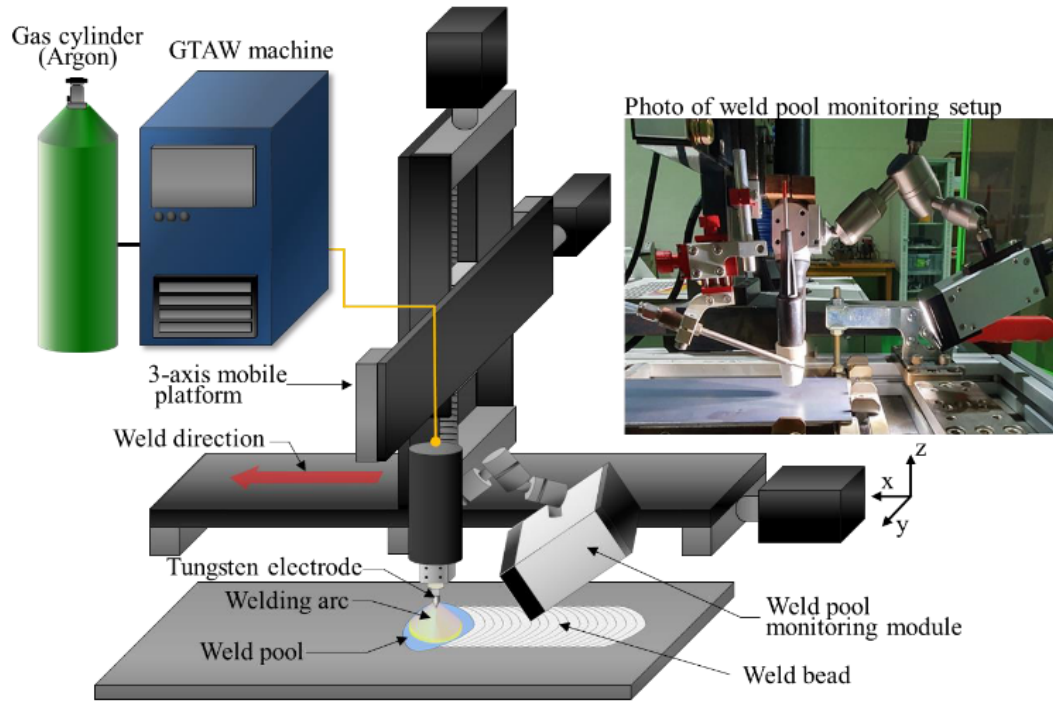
Weld pool monitoring setup for acquiring weld pool image dataset in gas tungsten arc welding (GTAW)
